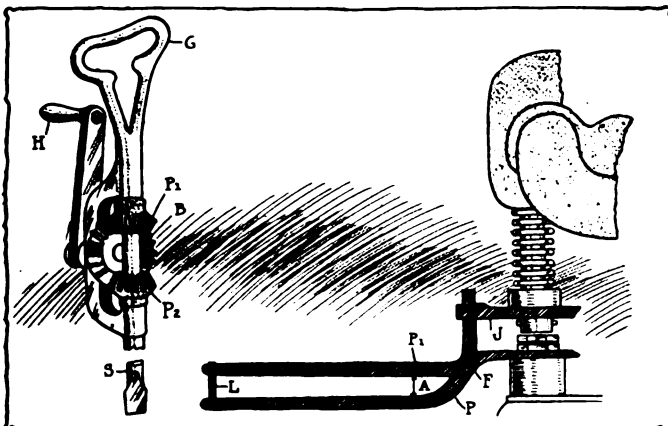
Warrow reciprocating grinder and Cummings valve lifter
